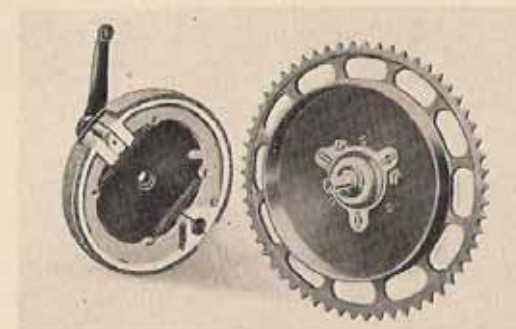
THE COMPONENT PARTS OF THE REAR BRAKE
